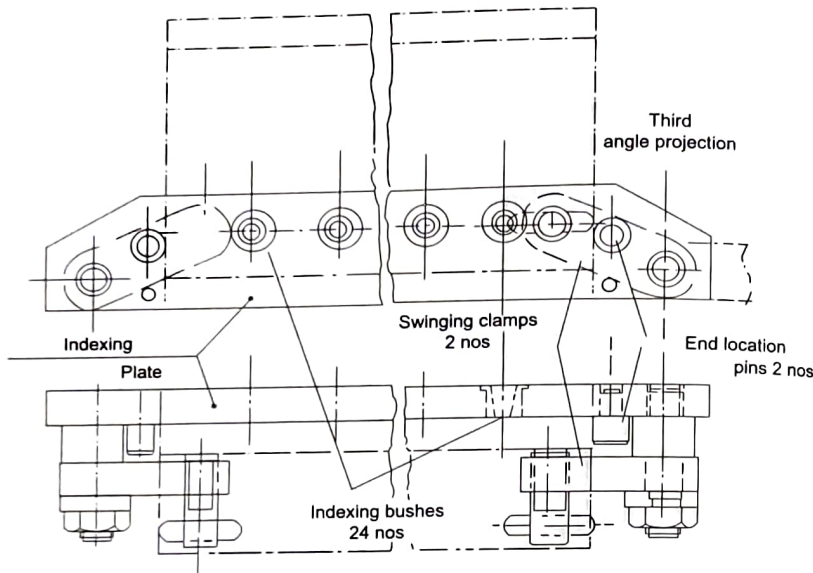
Indexing plate for workpiece in Fig. 4.2b
